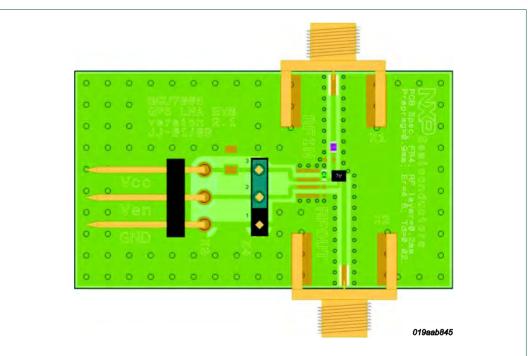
Printed circuit board lay-out of the BGU7005 (and BGU7007) GPS LNA evaluation board
